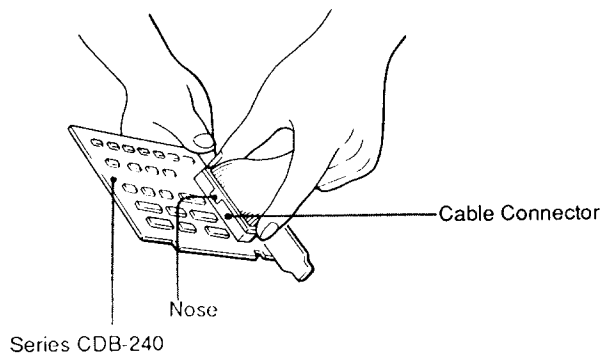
Attaching the Internal Host Bus Connector Cable to the Card
